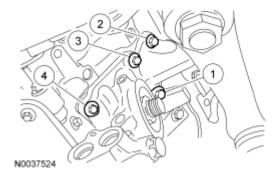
Oil Filter Adapter Bolts Torque Sequence Courtesy of FORD MOTOR CO.
